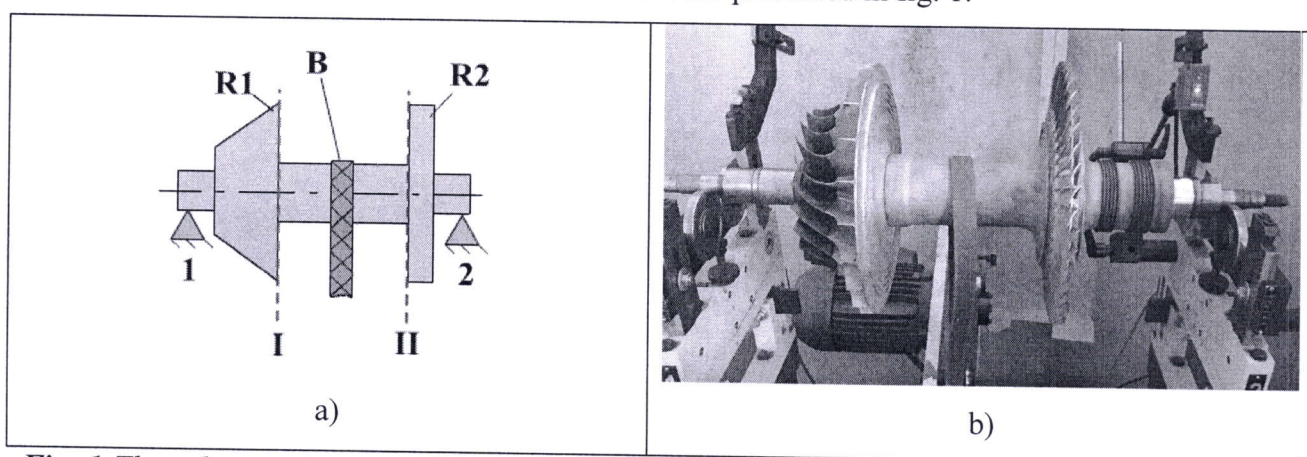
The scheme of the turbocharger rotor PDH35 dynamical balancing a) and the view of the rotor
